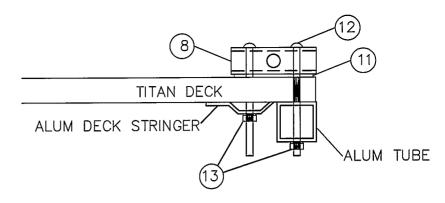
Fig. A ALUM TRUSS STYLE FRAME SHOWN
